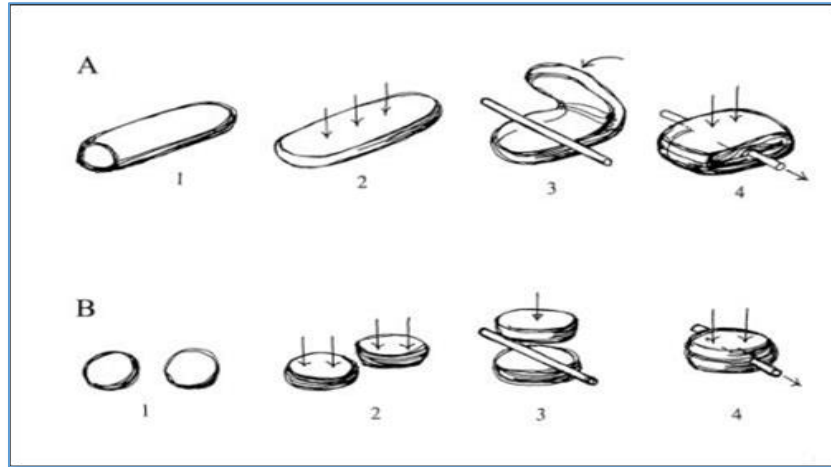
The two ways of mould pressing technique, for the bead formation
